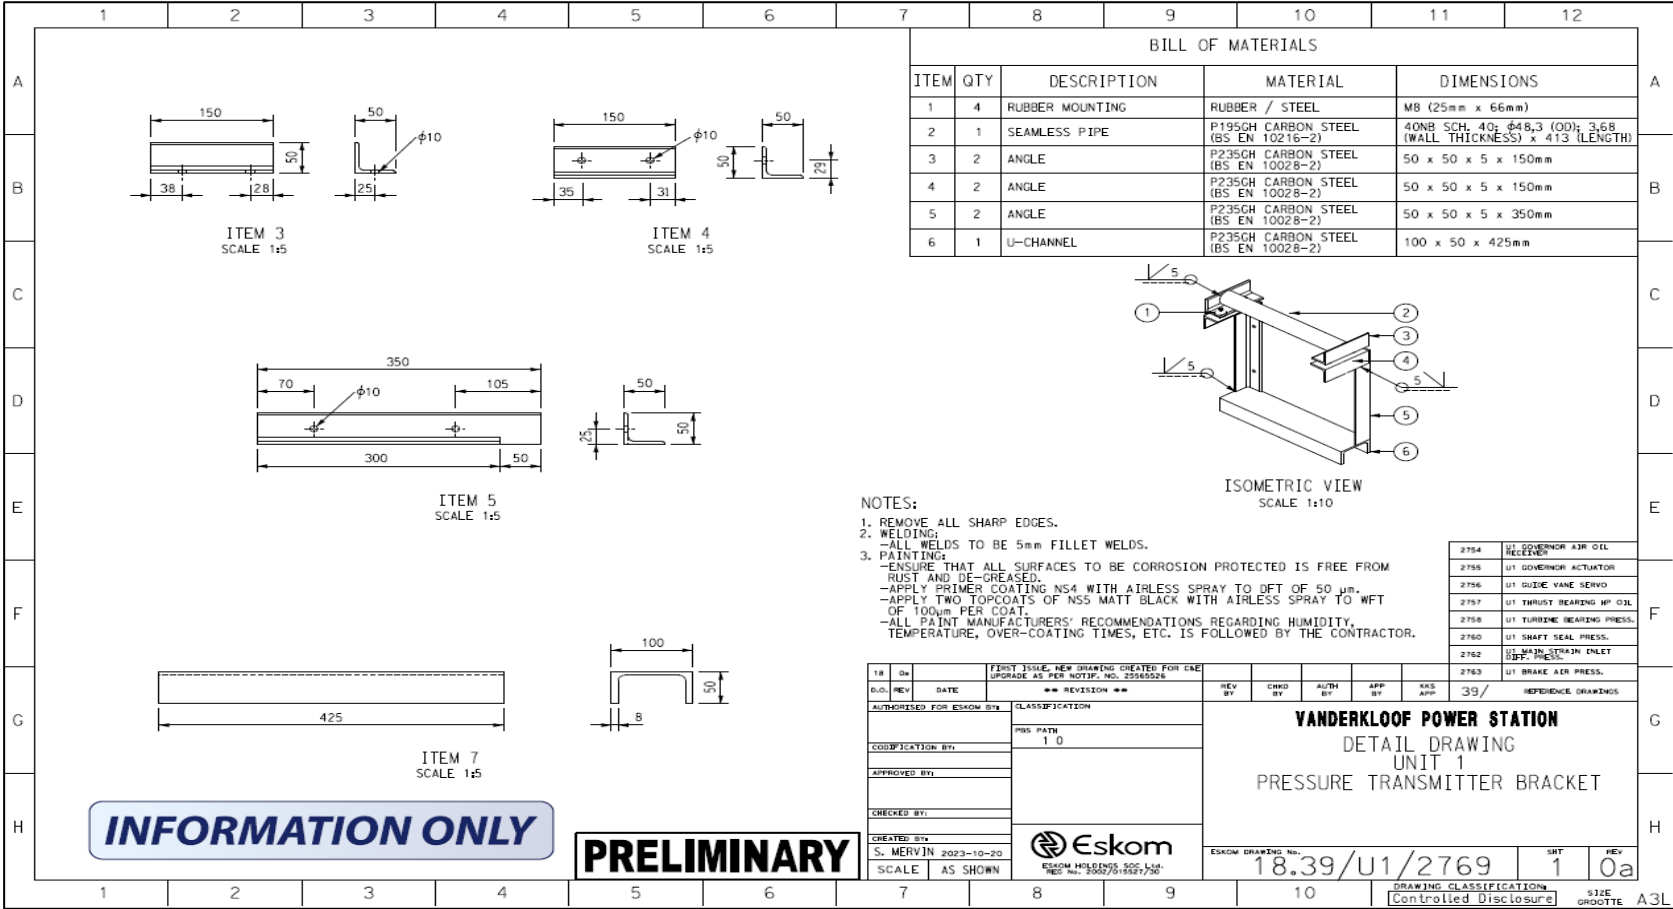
Detail Drawing Redundant Pressure Transmitter Bracket
